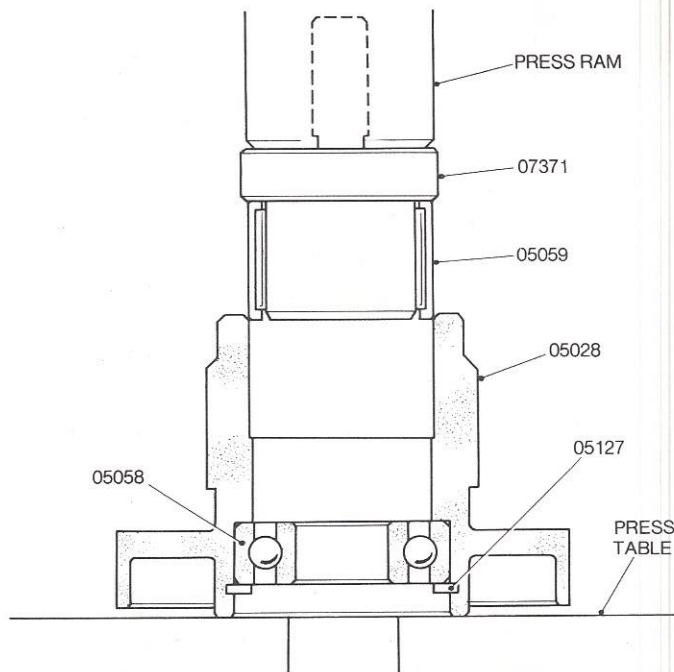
Assembly of the Crankshaft Housing Needle Roller Bearing
